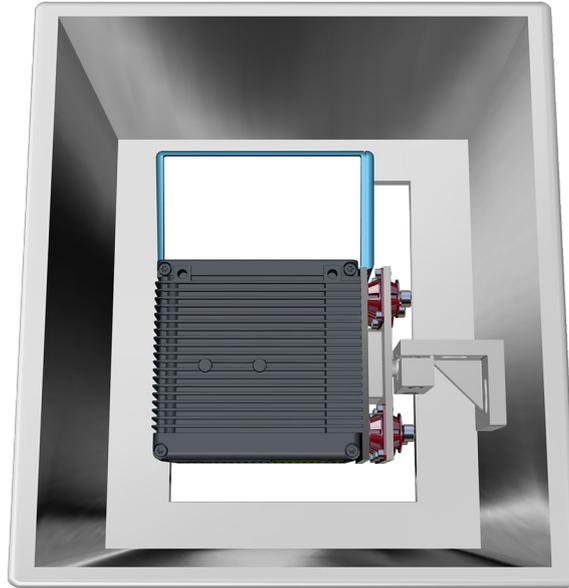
Mounting with mounting holder, oscillating mirror scanner, horizontal reading line
